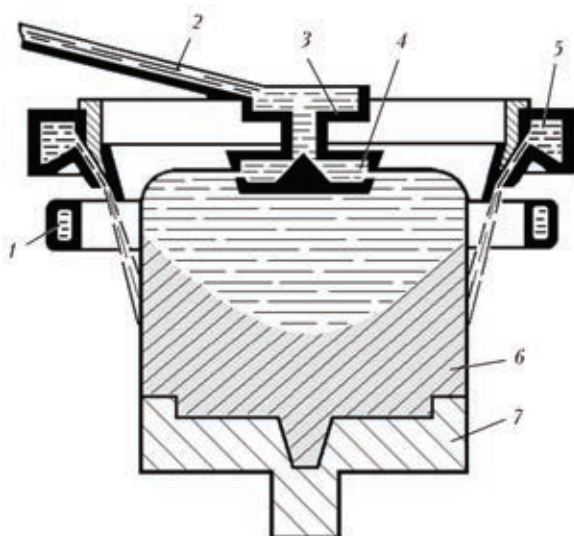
The scheme of electromagnetic casting in the mould [3]: 1 - inductor; 2 - tray; 3 - junction box; 4 - floating vessel, 5 - the coolant reservoir; 6 - ingot; 7 - base plate.
